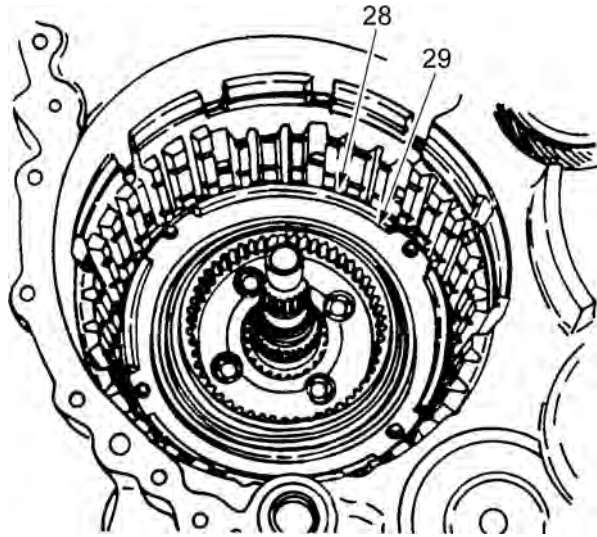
Second Clutch Piston Housing Assembly Retaining Ring Removal.
